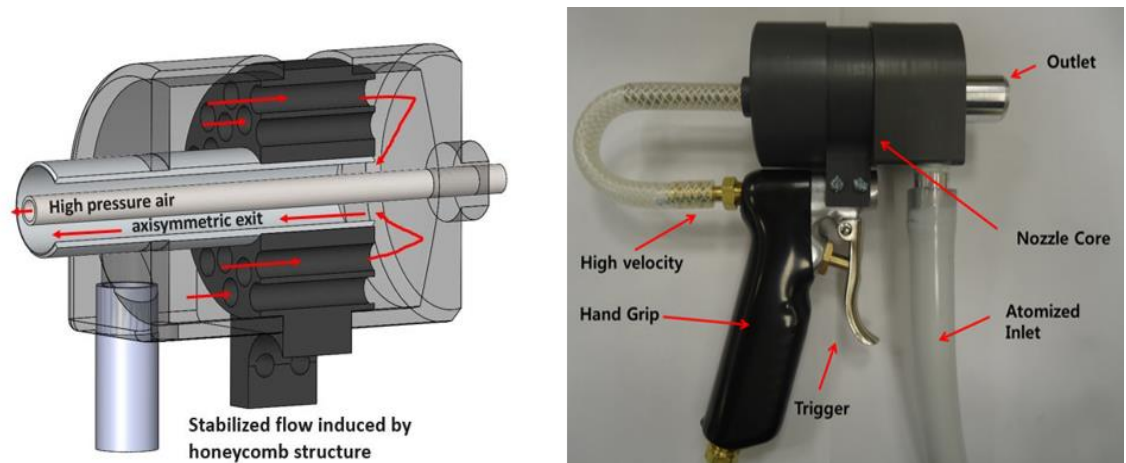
Handheld nozzle for improved 3D scanning: 3D model (left), and assembled nozzle (right).
